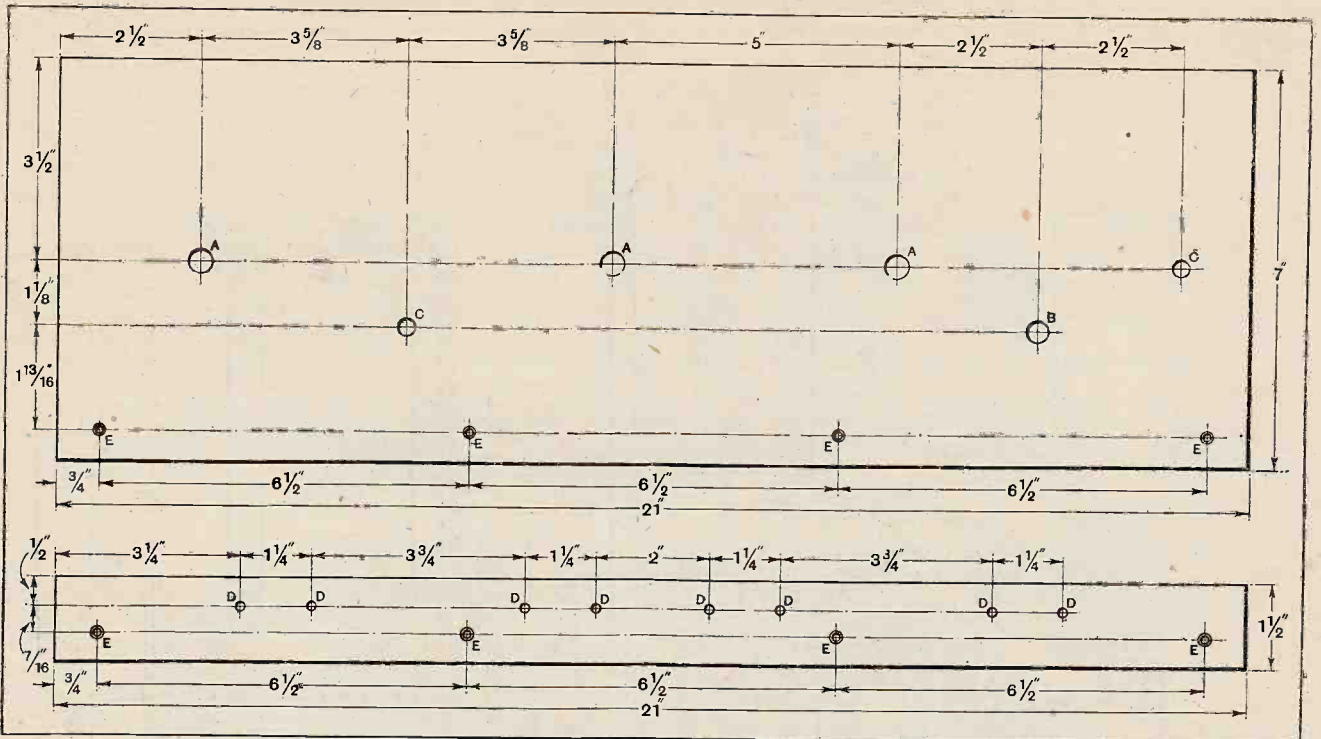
Dimensional data of panel and terminal strip. Sizes of holes are as follows: A = 7/16in. dia., B = 3/8in. dia., C = 5/16in. dia., D = 5/32in. dia., E = 1/8in. dia., countersunk for No. 4 wood screws.
